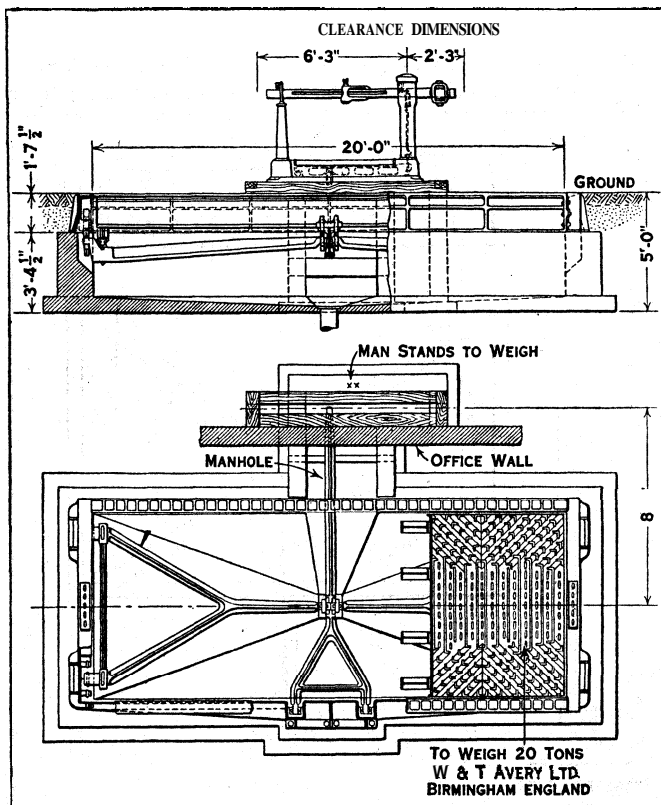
PLAN AND ELEVATION OF A MODERN WEIGHBRIDGE CONNECTED TO A "NO-LOOSE-WEIGHT" STEELYARD
